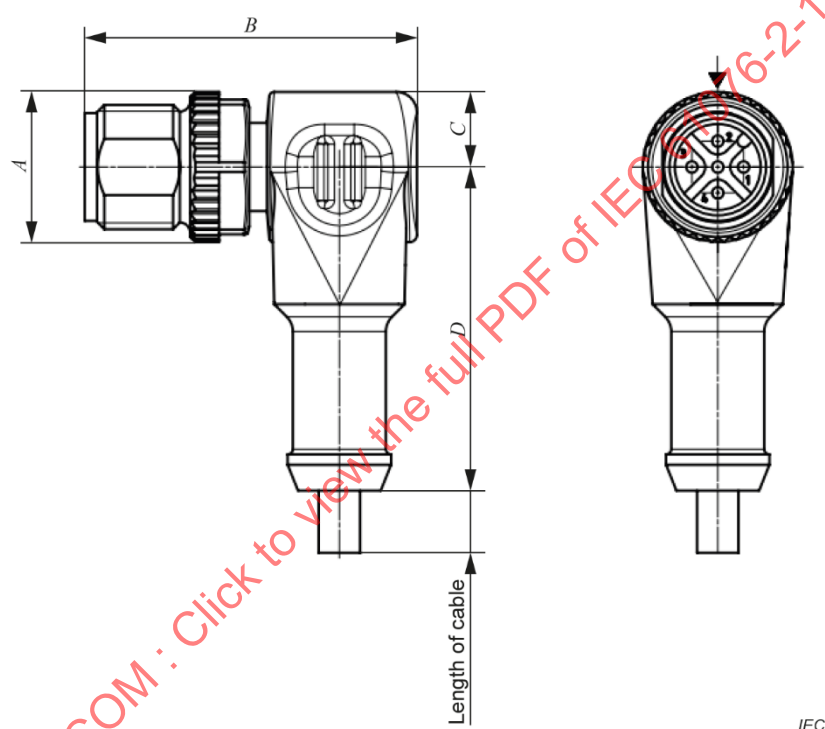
Non-rewirable connector, male contacts, right angled version, with locking nut
